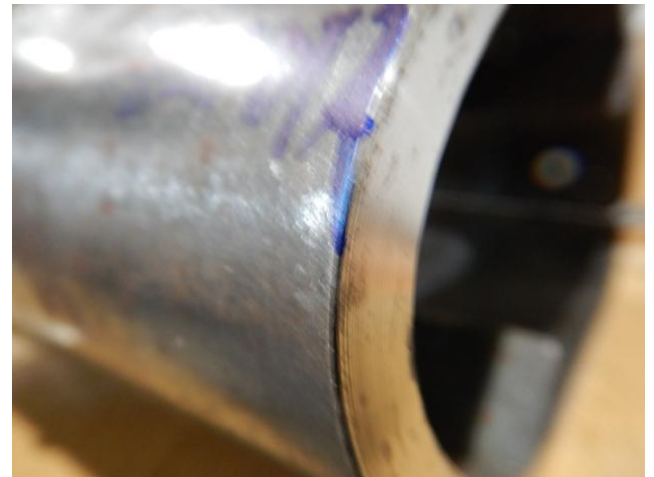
A view of the pipe edge of most flattened welded joint of LASER+GMA – no tears and cracks
